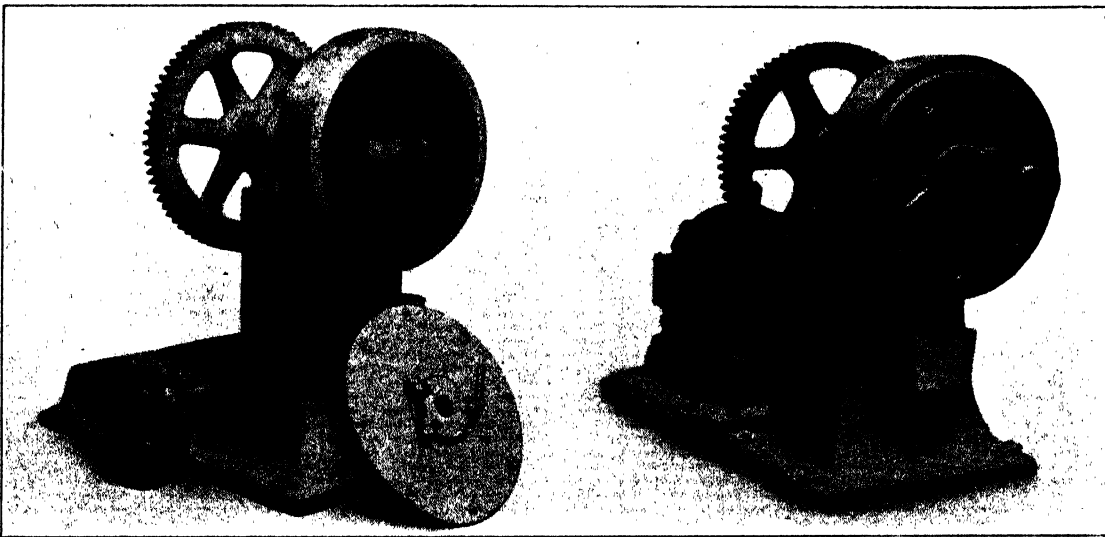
POINTING MACHINE—G. CROSSLEY.
